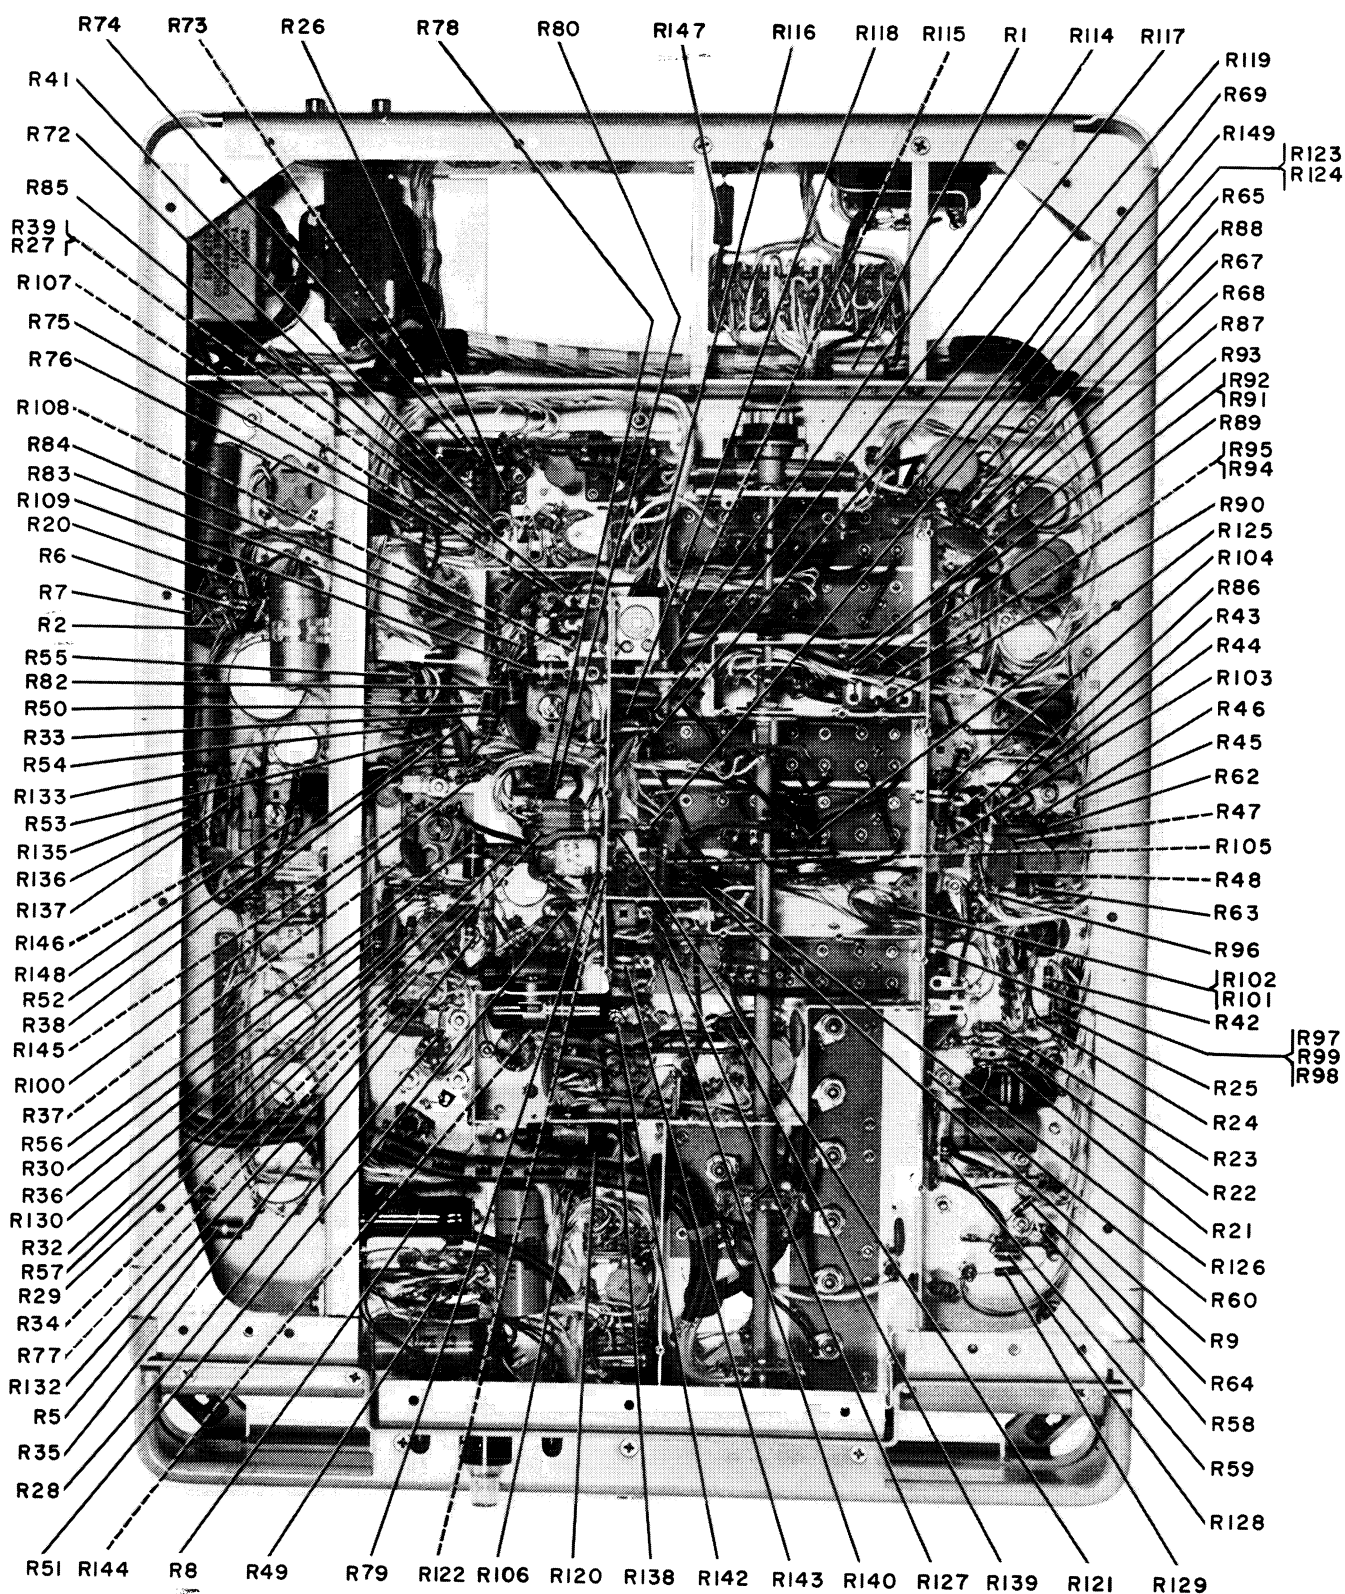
32MS-1A, Bottom View (A), Cover and Shield Removed, Keyed
